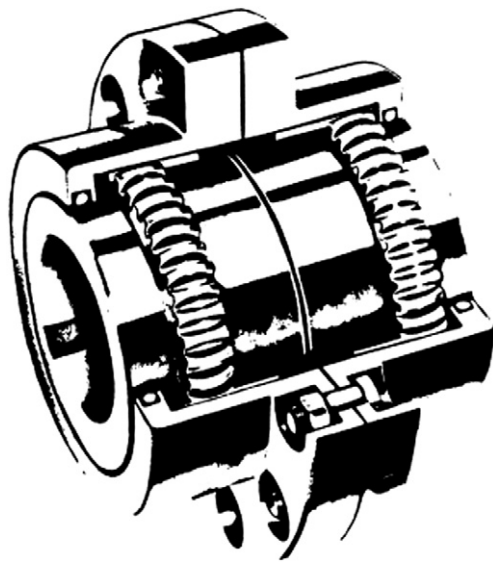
• Gear tooth coupling (grease packed) (Courtesy of Zurn Industries)
